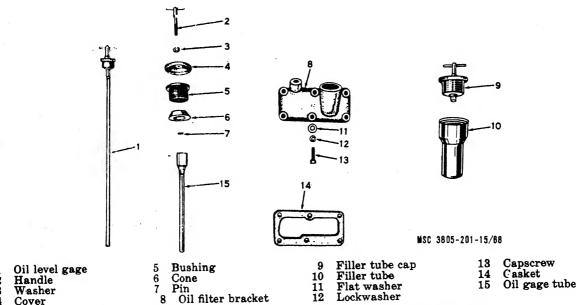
Oil level gage, filler tube, and bracket, exploded view.
